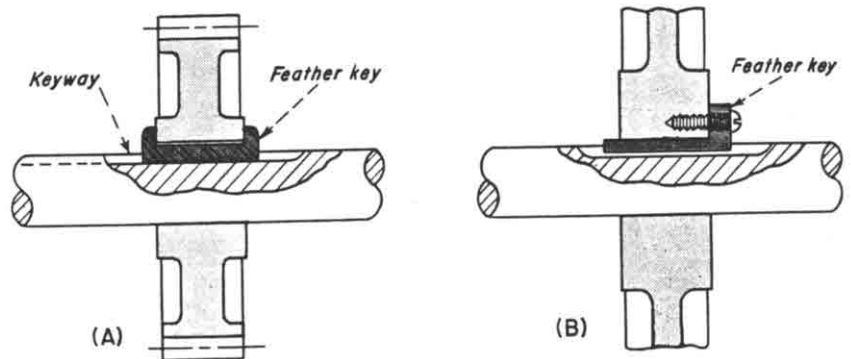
A feather key (A) allows axial gear movement. A keyway must be milled to the end of the shaft. For a blind keyway (B) the hub and key must be drilled and tapped, but the design allows the gear to be mounted anywhere on the shaft with only a short keyway.
